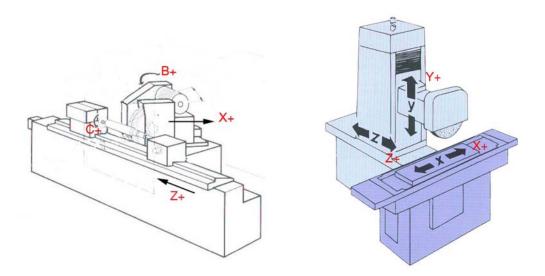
MCS for grinding (cylindrical grinding machine, surface grinding machine)
